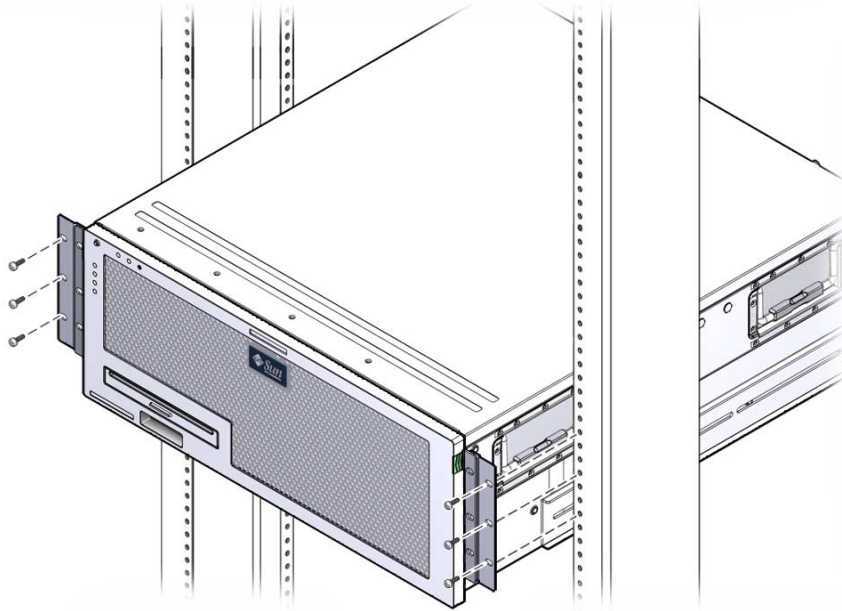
Attaching the Front Adjuster Brackets to the Front Hardmount Brackets
